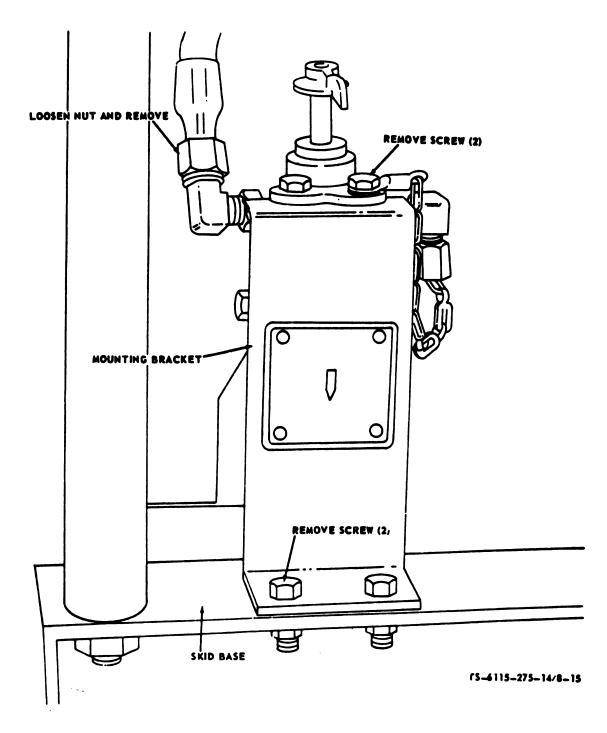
Three-way fuel valve, fuel filter, fuel valve mounting bracket, removal and installation (all serial numbers except MA68-0001 through MA68-2987) (Model MEP-018A).
